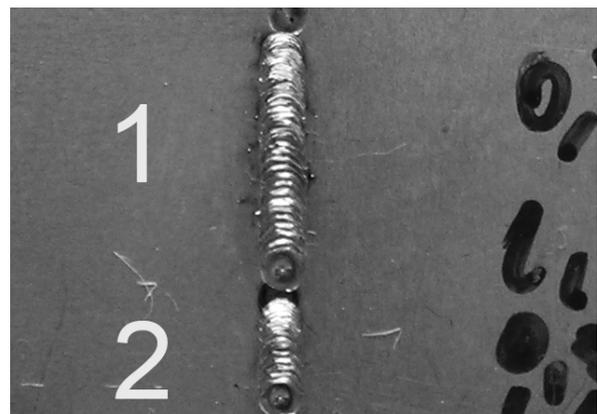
Edge-to-edge welding with pulse duration:
